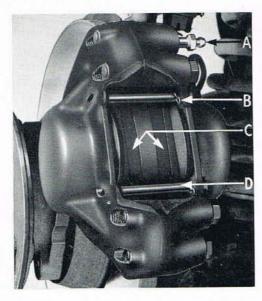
Location of front brake bleed screw and brake pad retaining details.
